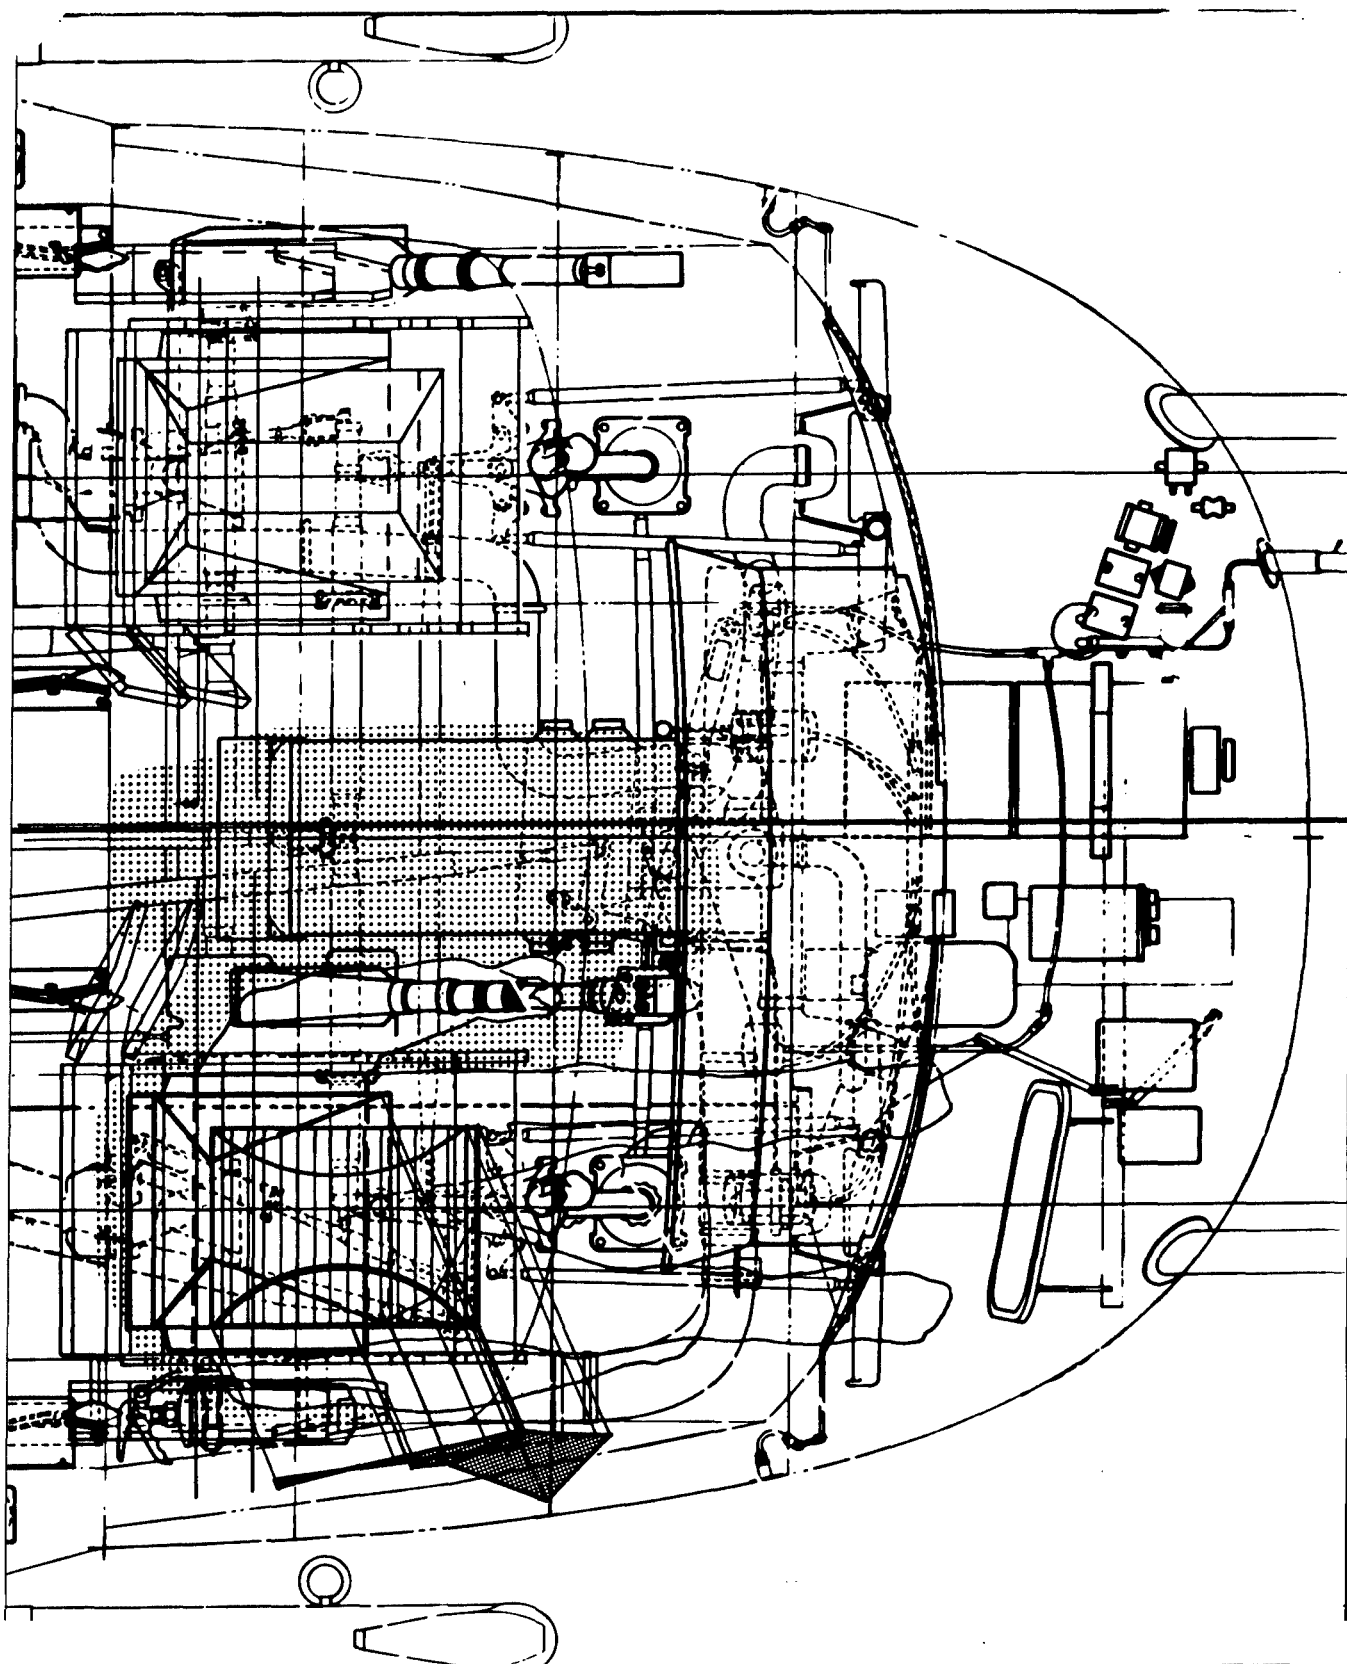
ARMOR CONFIGURATION 2 -- PLAN VIEW 67.5° AZIMUTH, -45° ELEVATION
